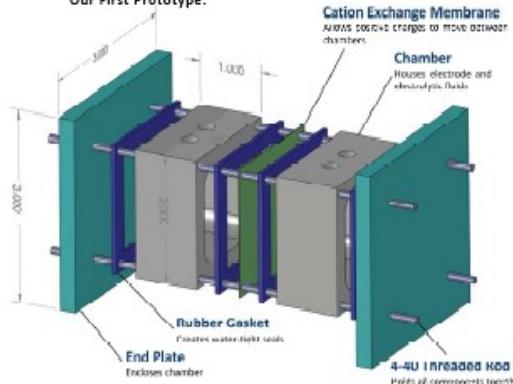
Exploded SolidWorks Assembly of MFC. Dimensions are in Inches.
